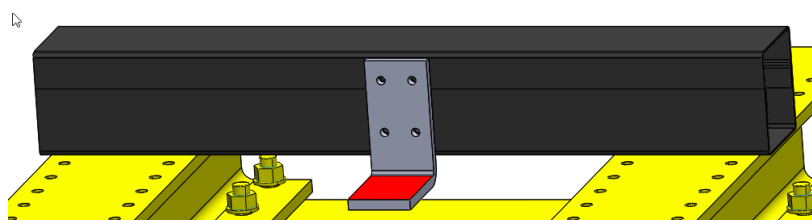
Prototype mounted on I profile beams with highlighted load application area.
